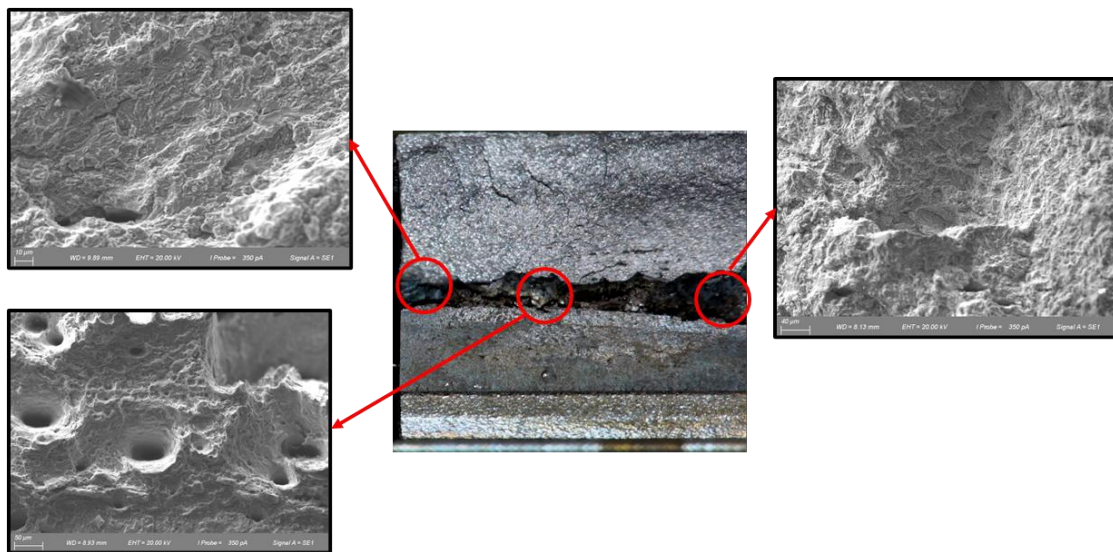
(a) FZ2 NP H tested specimen fracture surface; (b)-(d) quasi cleavage planes in the edges; (c) dimples in the central region.
